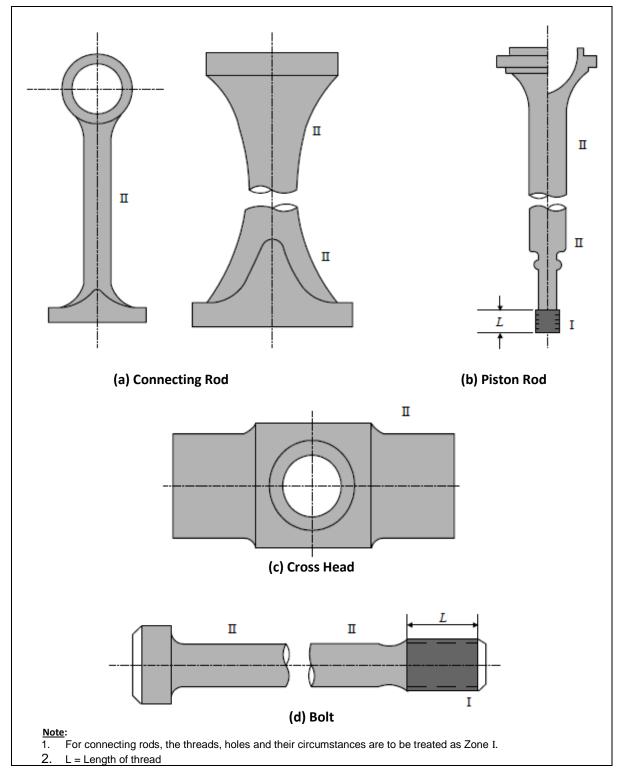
Zones for Magnetic Particle/Liquid Penetrant Testing on Machinery Components
